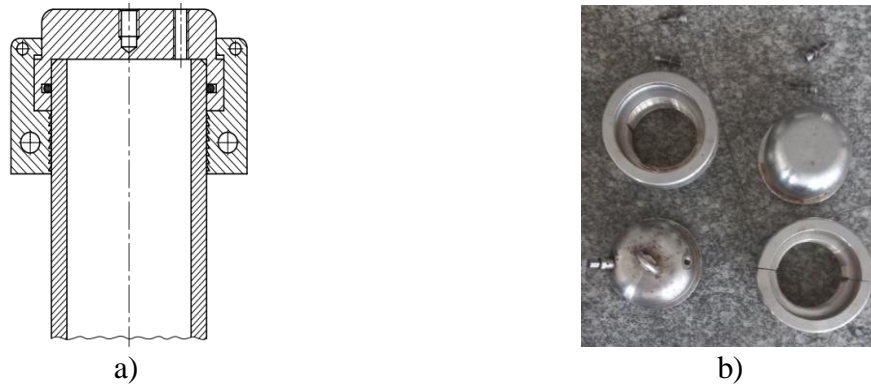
Type A steel caps: a) graphic representation; b) real appearance
